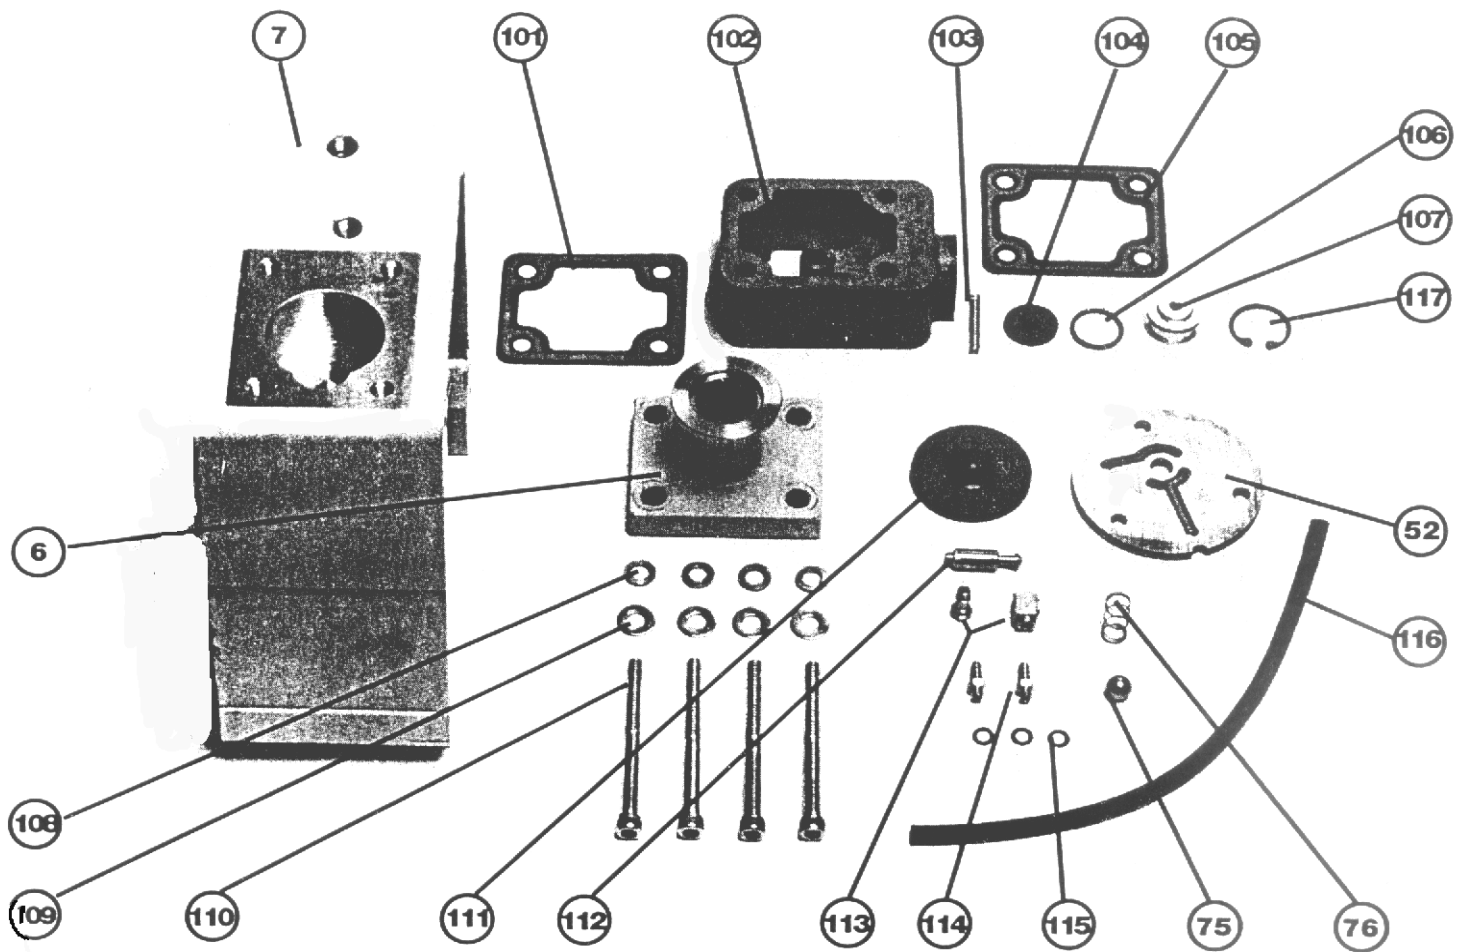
Exploded View for Isolation Valve, Models 8915A-55, 8915E-55
